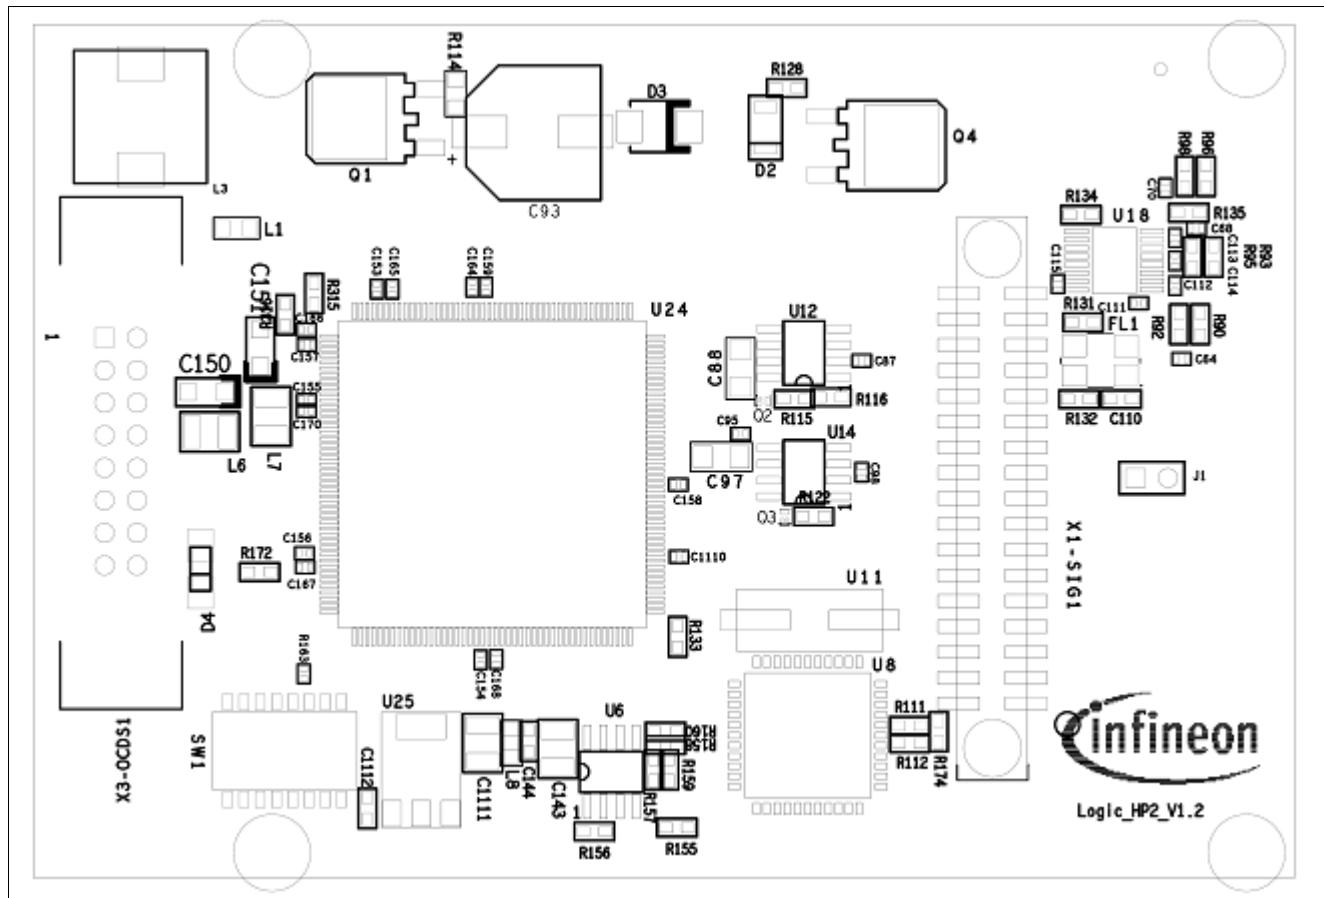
Assembly Drawing of the Logic Board v1.2 (Top)
